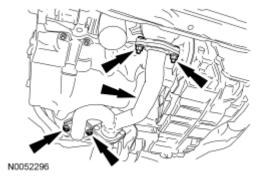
Locating Exhaust Flexible Pipe Clamp & Exhaust Hangers Courtesy of FORD MOTOR CO.
